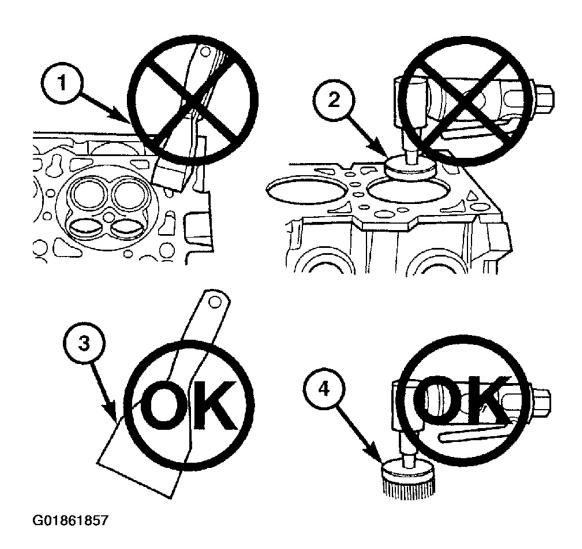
Preparing Engine Gasket Surface Courtesy of DAIMLERCHRYSLER CORP.
